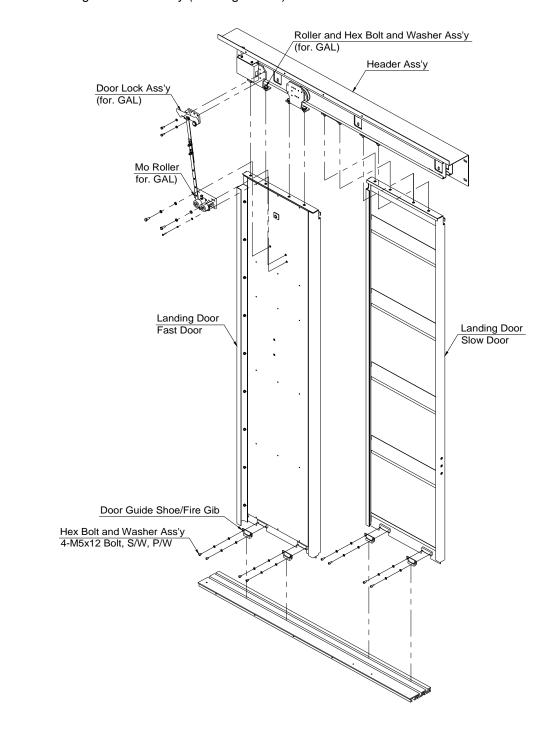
LANDING DOOR ASSEMBLY (TWO SPEED)
